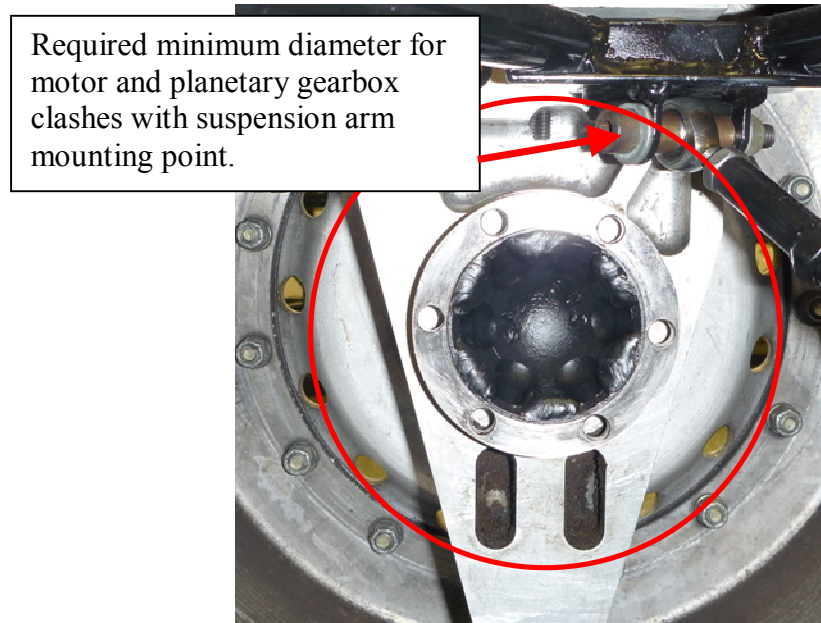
suspension arm in the way of axial mounting of motor and gearbox on the inboard face of the upright.
